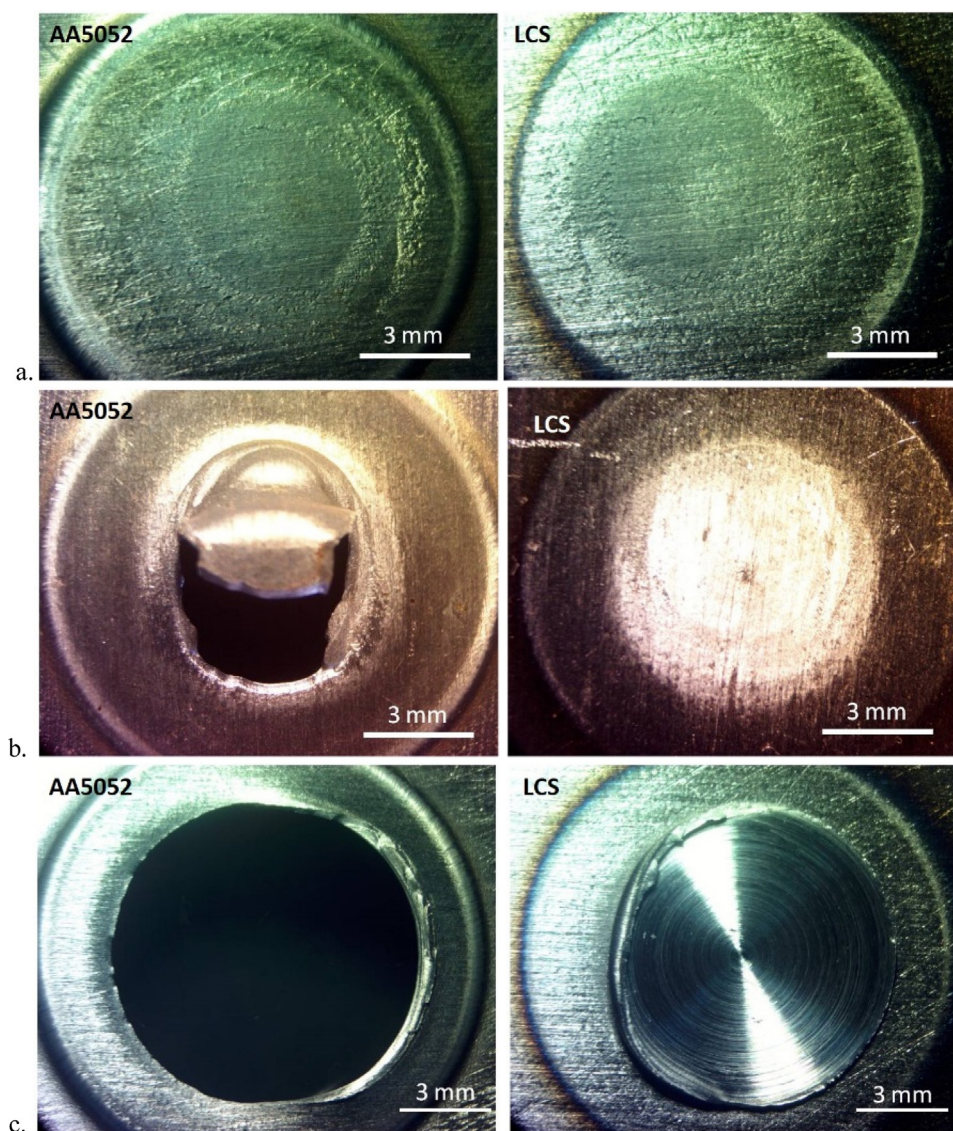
Fracture surfaces of PT: (a) 20-B, (b) 55-A and (c) 65-C.
